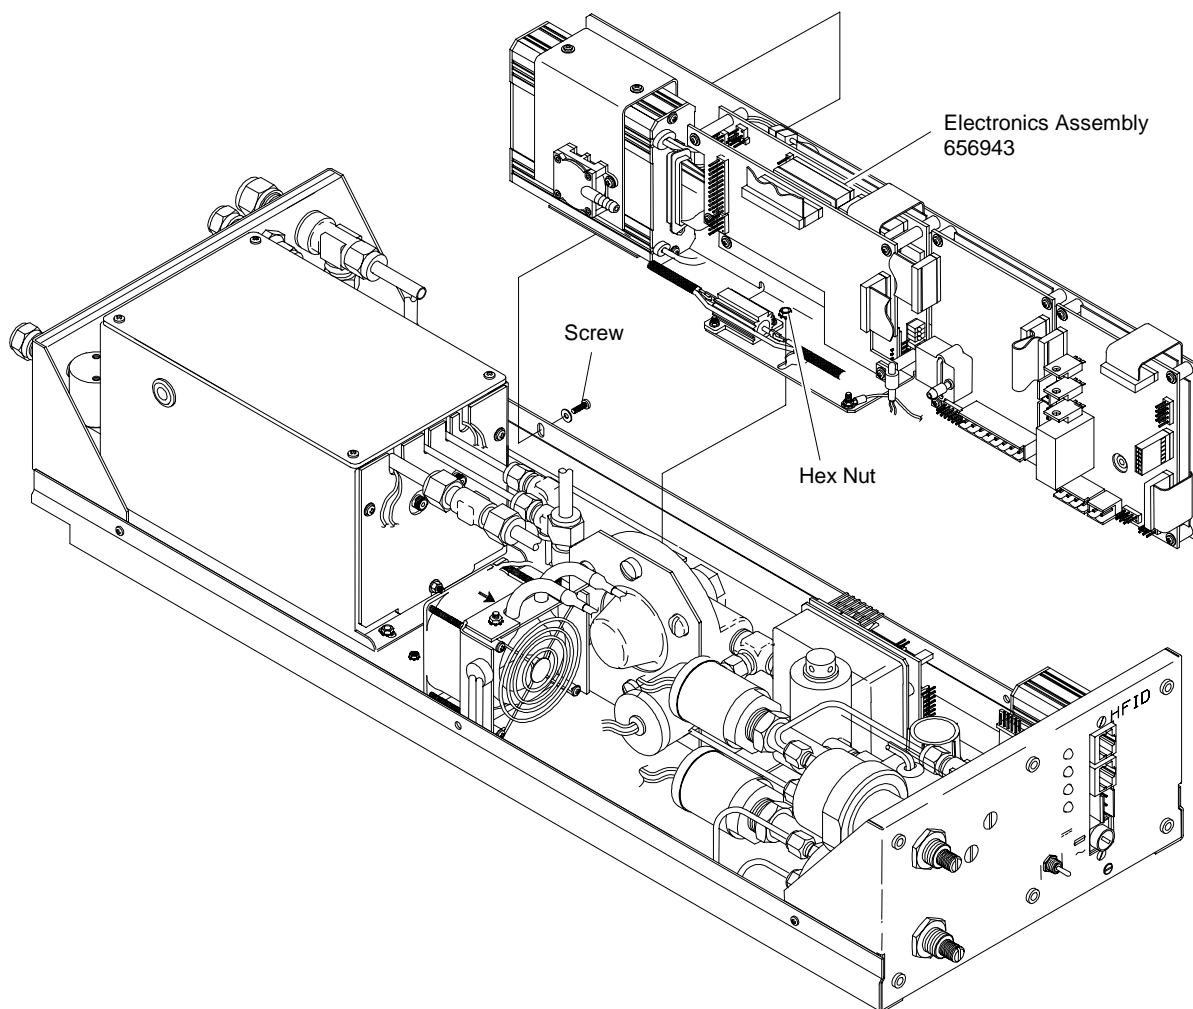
THERMAL BLOCK ASSEMBLY
